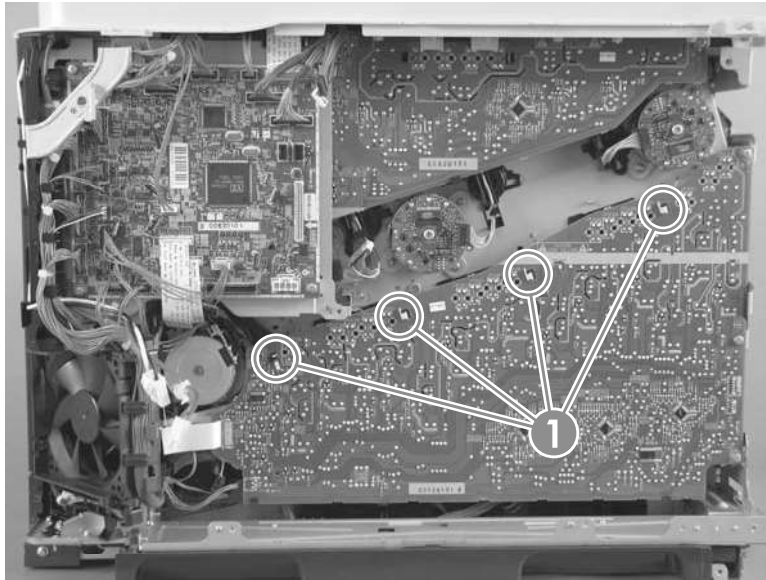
Remove the high voltage power supply lower (1 of 4)
